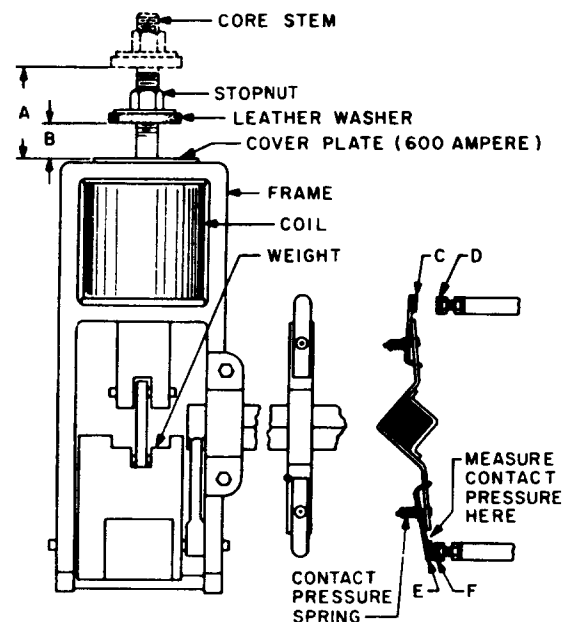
Plunger and Auxiliary Contact Adjustment — Bulletin 905, 907, and 908 Switches
